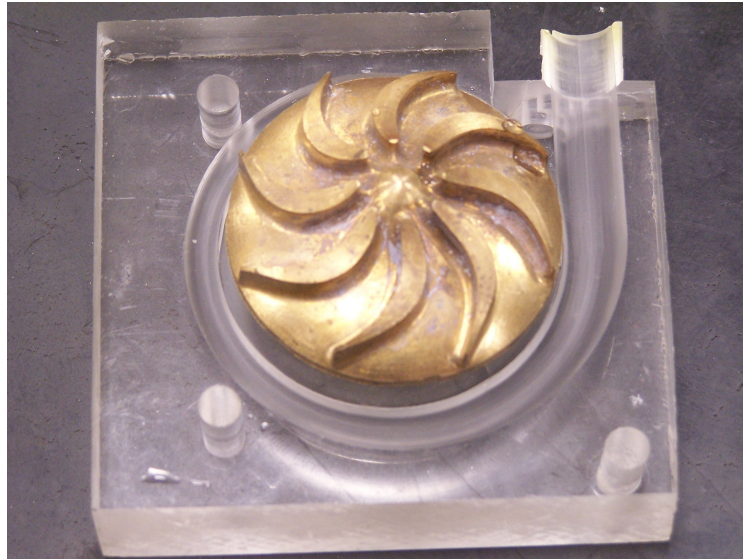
Produced Impeller Model 16 and the Lower Casing
